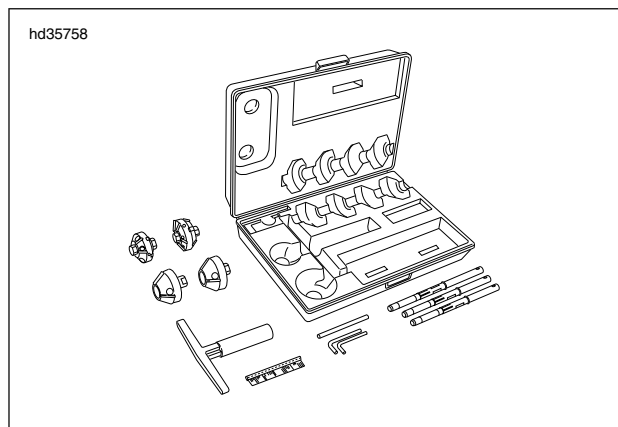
Neway Valve Seat Cutter Set (Part No. HD-35758A)
